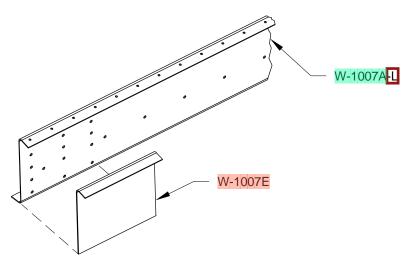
MATCH-DRILLING THE REAR SPAR DOUBLER PLATE
